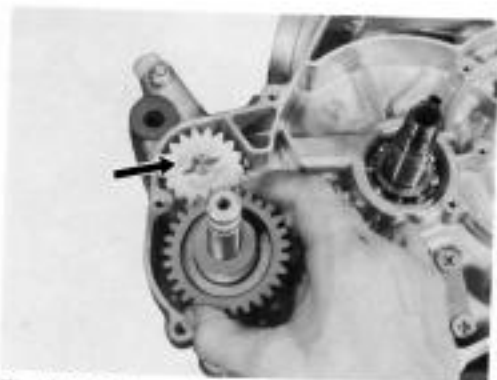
Pull out kick starter drive gear and oil pump drive gear.
